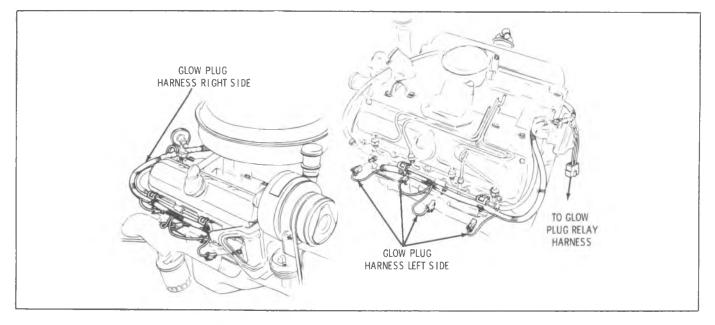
Diesel Engine Glow Plug Wiring Harness
